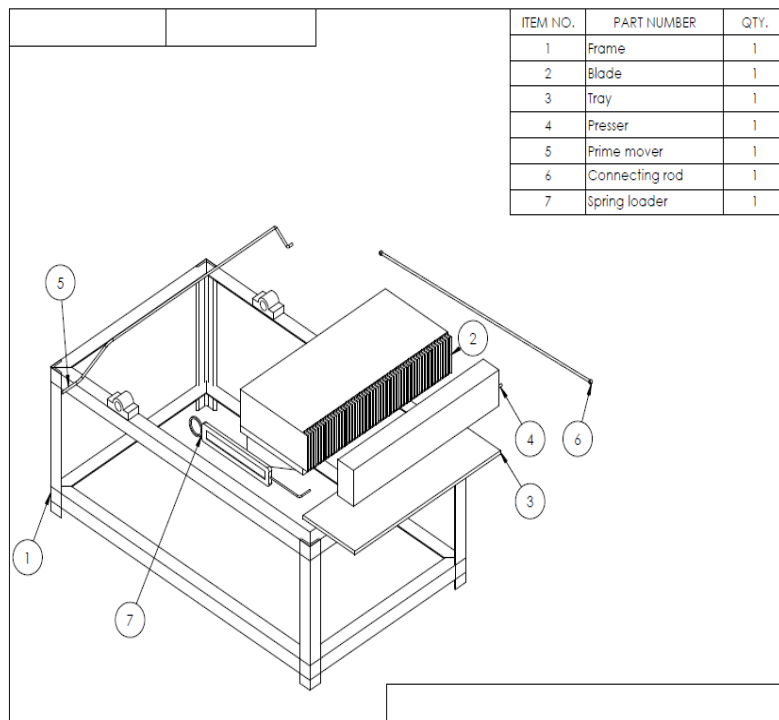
Machine diagram showing parts (1- Frame, 2- Blade, 3-Tray, 4-Presser, 5- Prime mover, 6- Connecting rod, 7-Spring loader)
